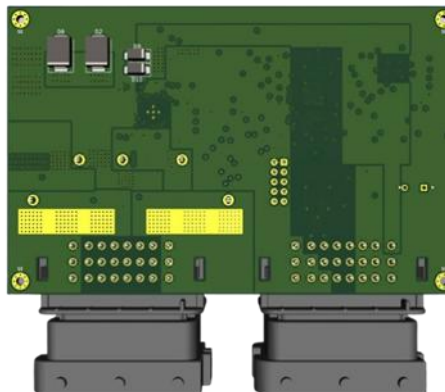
H-Bridge Brushed DC Motor Driver Circuit Board Back Side 3D Image
